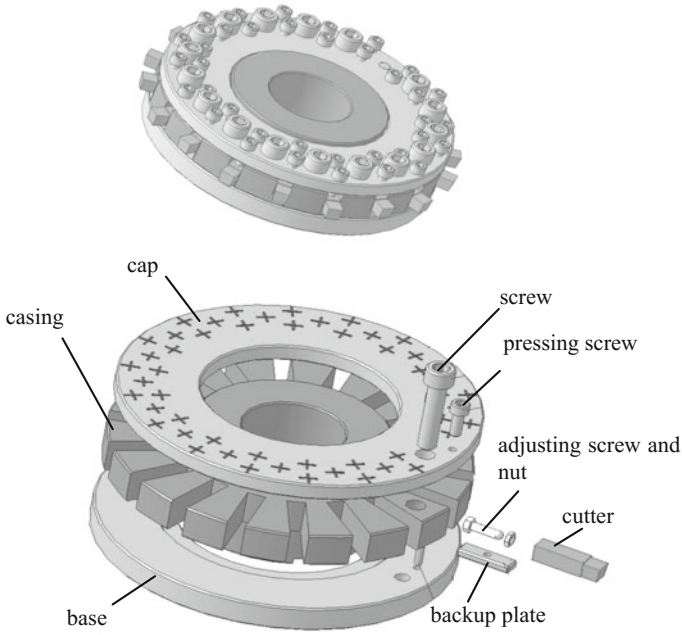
Plane cutting head for machining the spiroid gearwheel teeth
